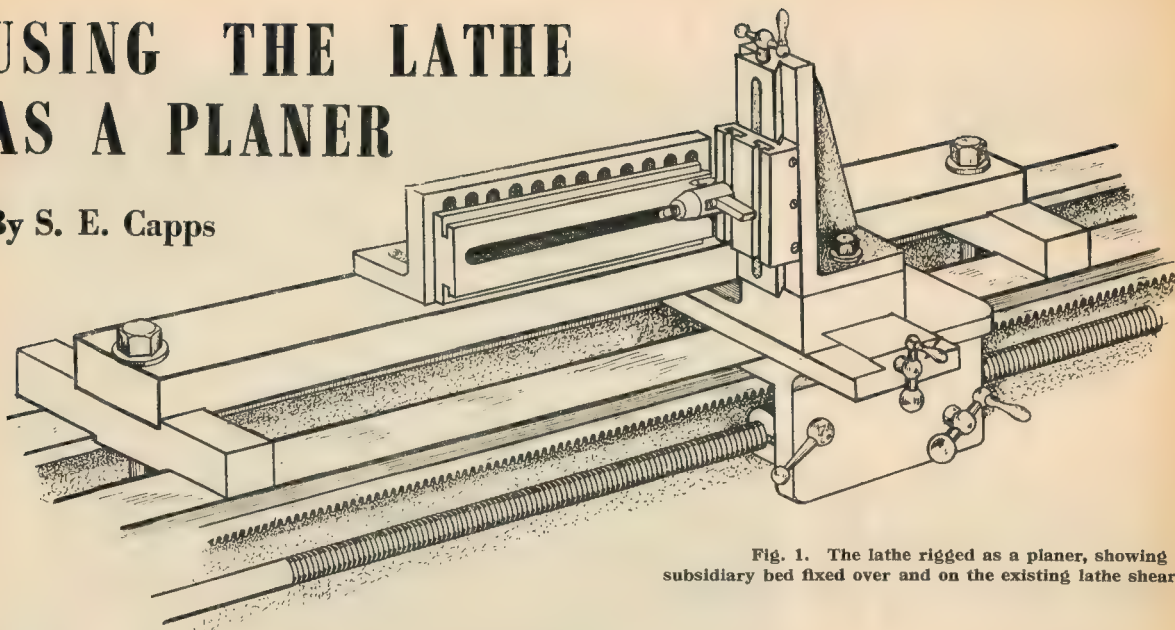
The lathe rigged as a planer, showing a subsidiary bed fixed over and on the existing lathe shears
